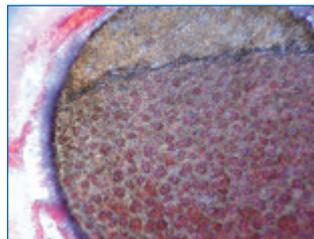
Sample BGA joint after dye-and-pry testing.
